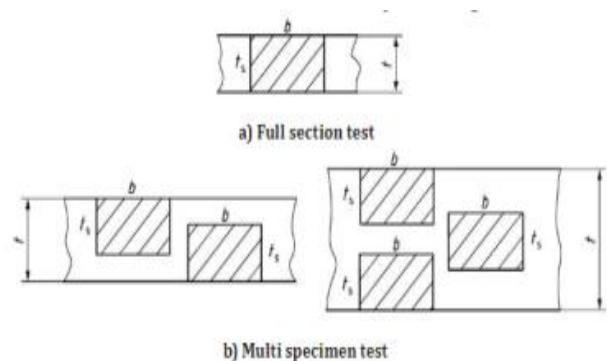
Location of test specimens depending on the thickness of the welded joint [8]
